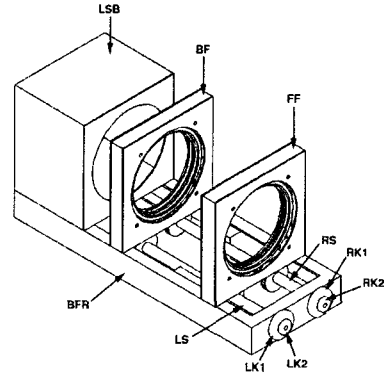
Assembled shape of the developed multi-purpose polariscope
